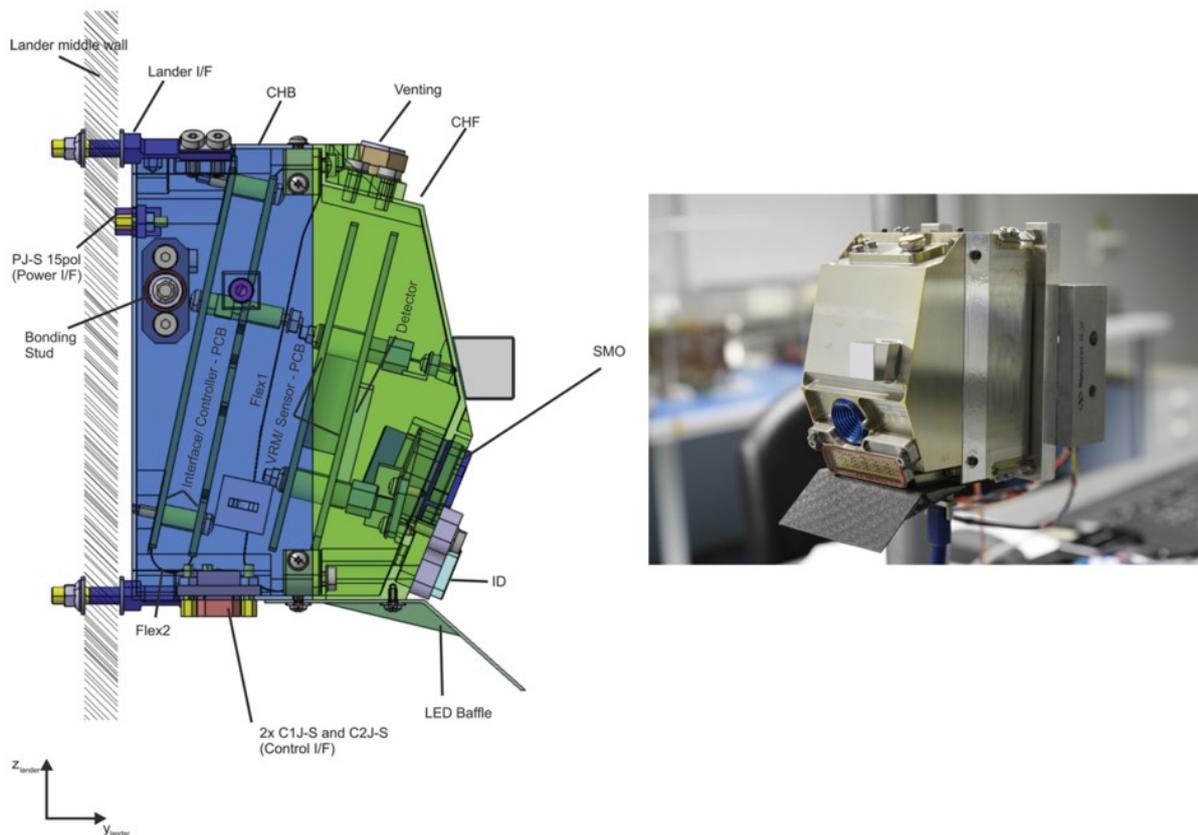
Left: MASCOT drawing (CHF = Camera Housing Front, CHB = Camera Housing Back SMO = Surface mode optics, ID=Illumination Device, C1J-S,C2J-S,PJ-S = plug definitions). Right: MasCam flight model
